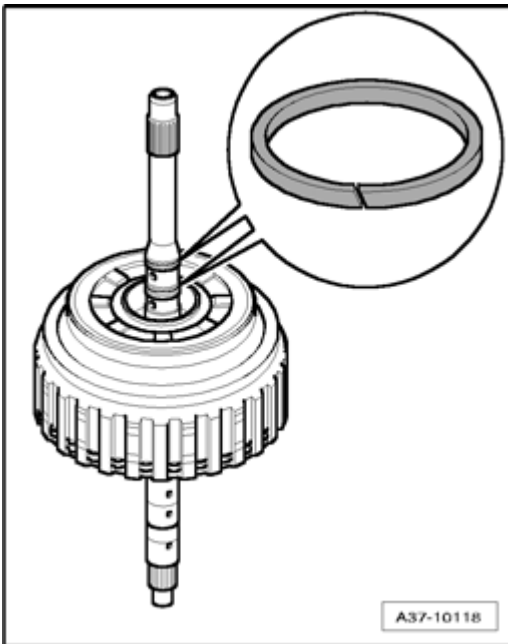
Locating Rectangular Rings On Input Shaft Of Tower "II"
